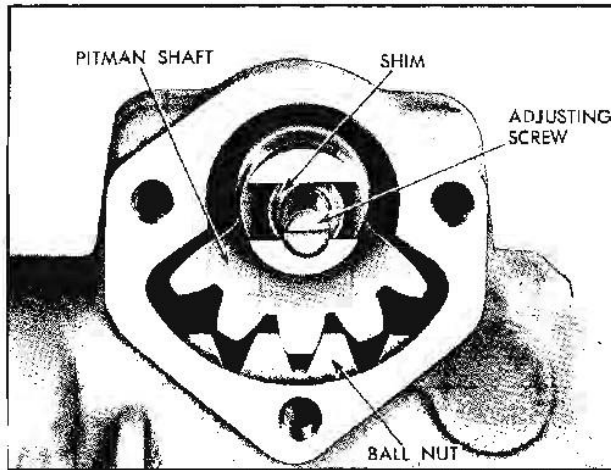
Positioning Pitman Shaft and Ball Nut
